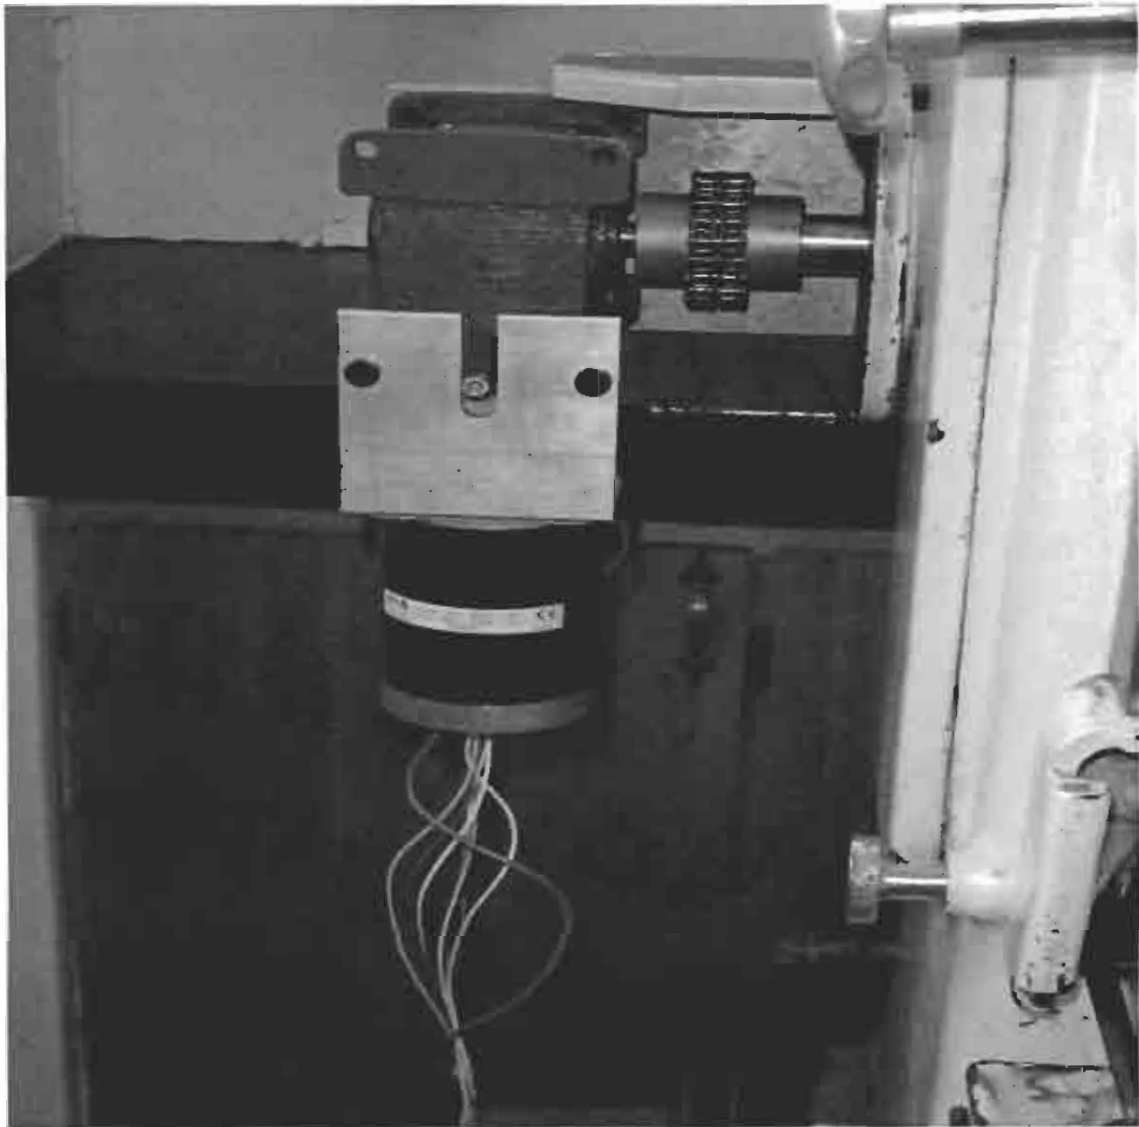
New stepper motor fitted to the eccentric tablet press.
